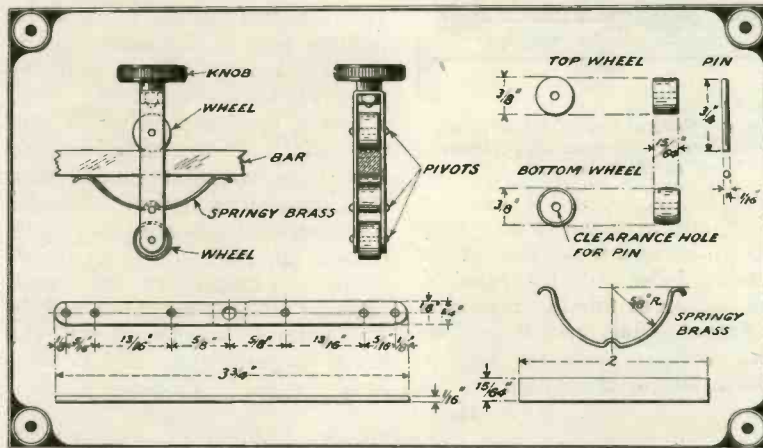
Illustrating the general arrangement of the wheel contacts and their component parts.
